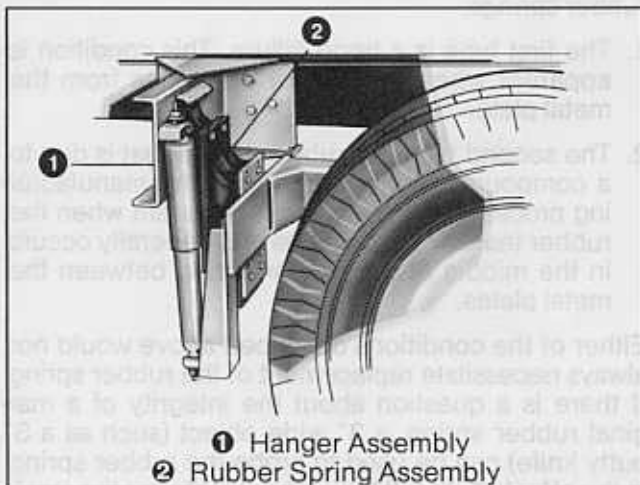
Rubber Spring Assembly and Hanger Assembly
